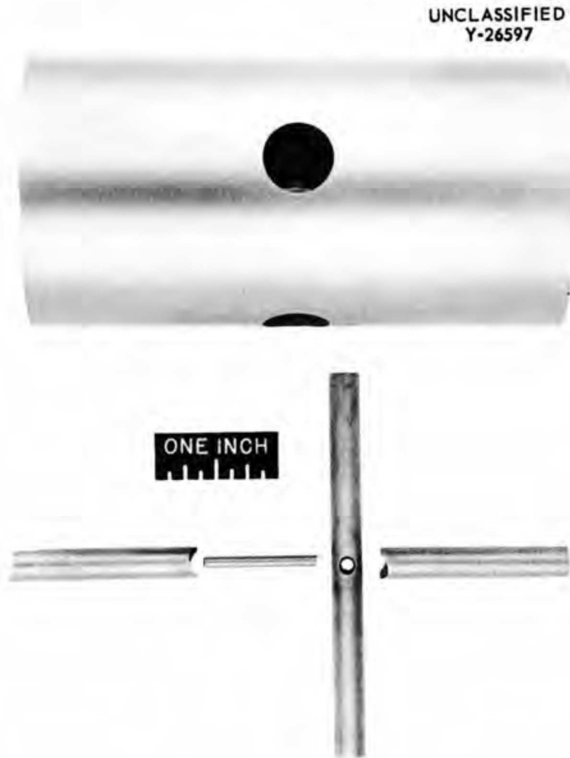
Exploded View of Simulated Pump Journal Bearing Subassembly. The molybdenum pins are to be joined to the INOR-8 or Inconel shaft by brazing.
